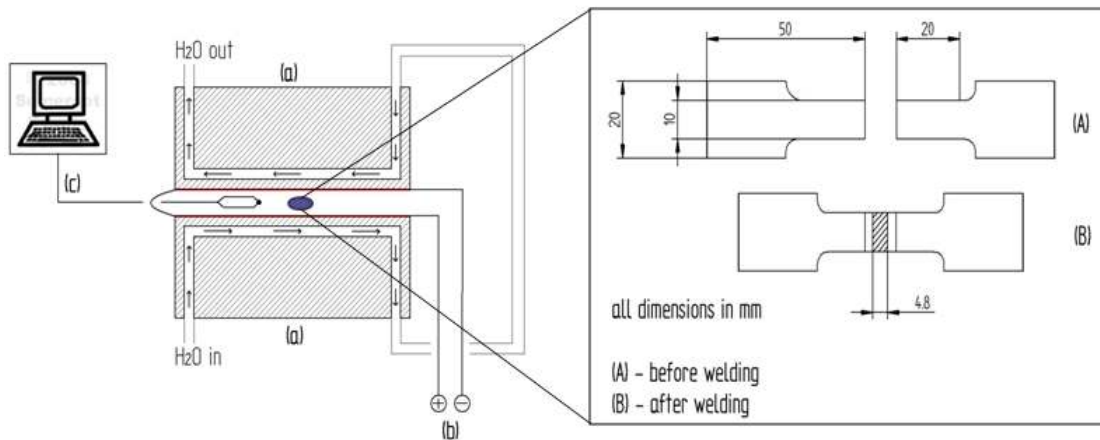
left: setup for impulse welding (a) welding head, (b) Nichrome heating elements connected to a DC power supply, (c) digital data acquisition system; right: sample dimensions
